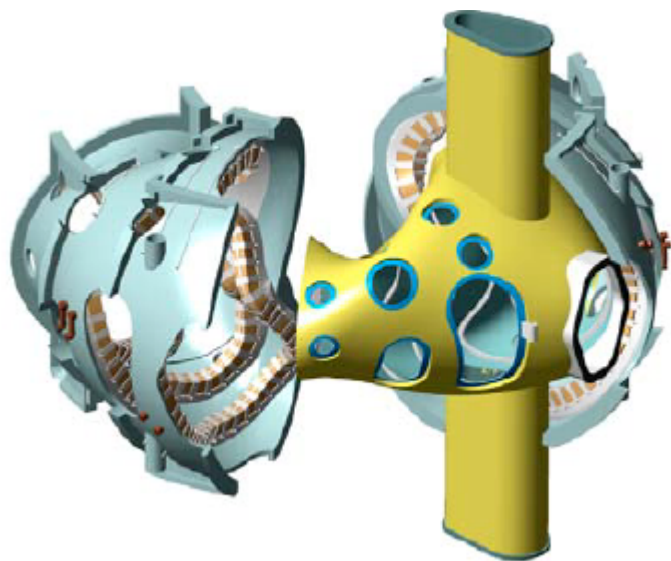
Assembly of the Modular Coils and a Vacuum Vessel Segment.
